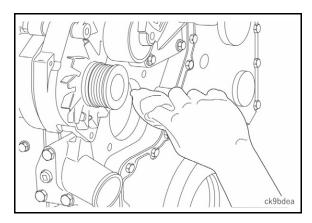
CLEAN THE CYLINDER BLOCK SEALING SURFACE
